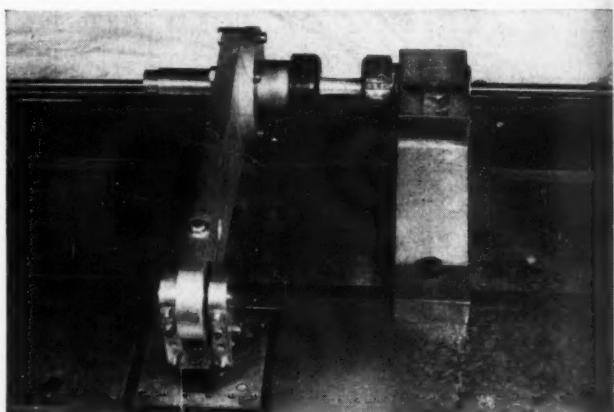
Torsion fixture adapted for combined torsion and bending stresses
